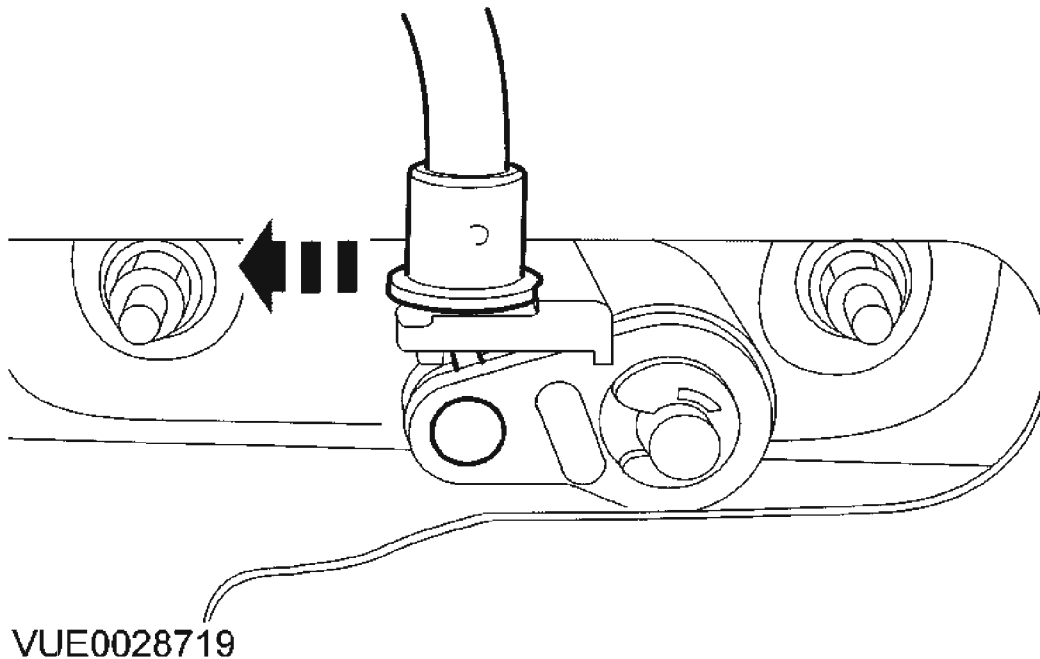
Disconnecting Liftgate Latch Cable From Liftgate Lock Assembly
